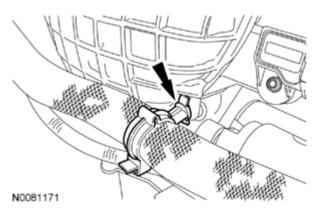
Locating Coolant Tube Retainer Courtesy of FORD MOTOR CO.
